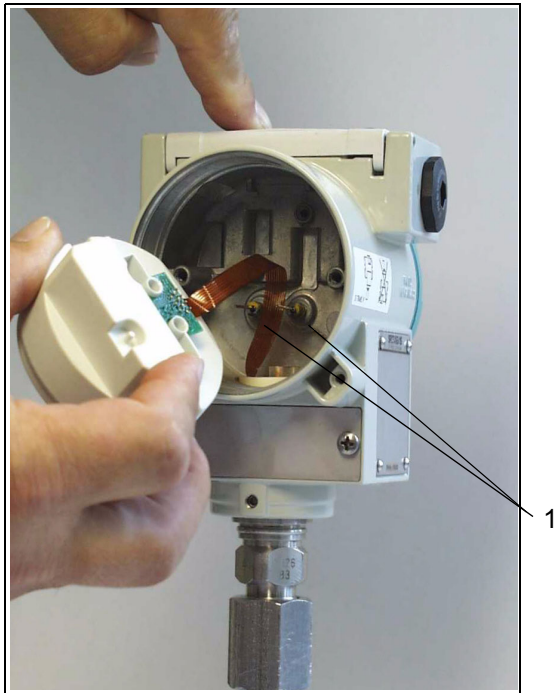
Arrange the conductor band between the feed-thru pins (1)
